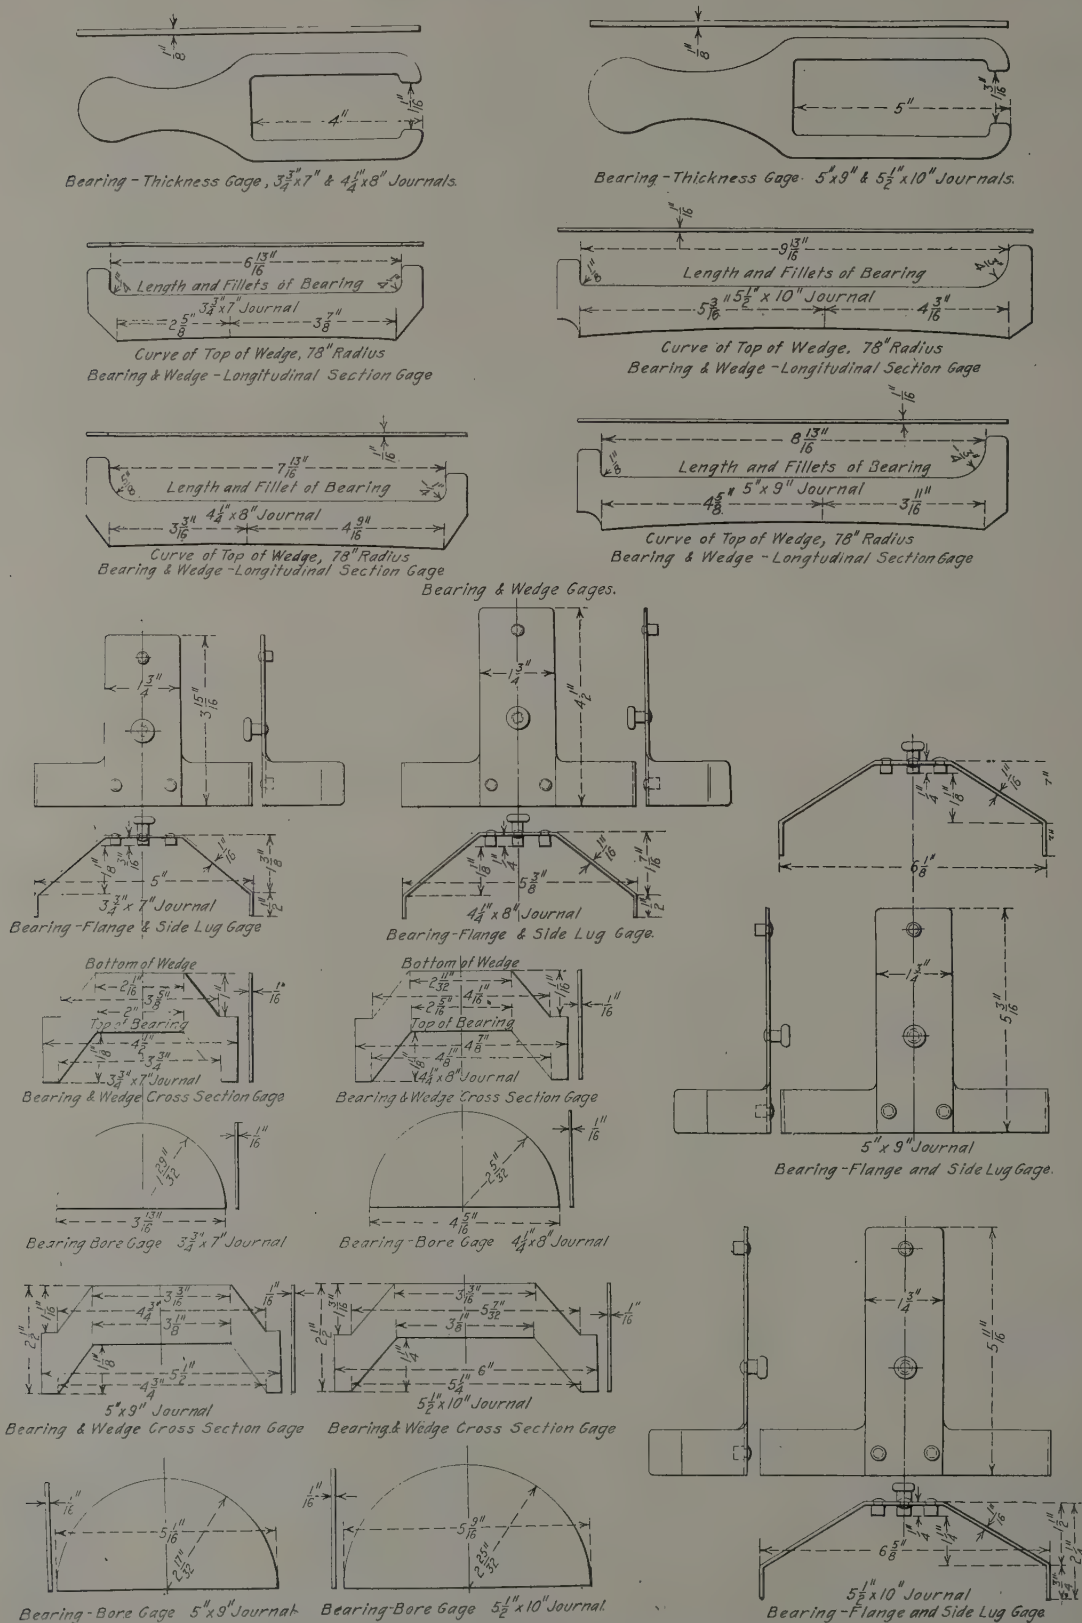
Journal Bearings and Wedge Gages. (M. C. B. Sheet 14.)
